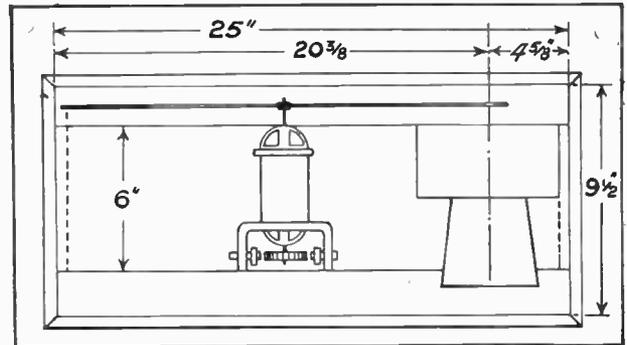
A plan of the baseboard lay-out supported on the plinth.
